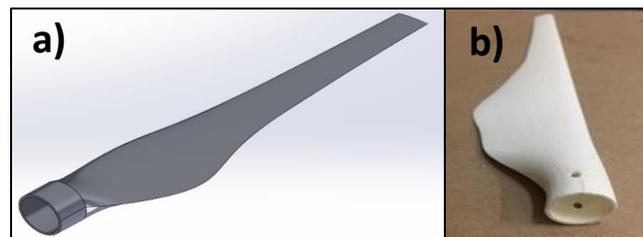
a) Prototype Turbine Blade in Solidworks and b) 3D Printed
